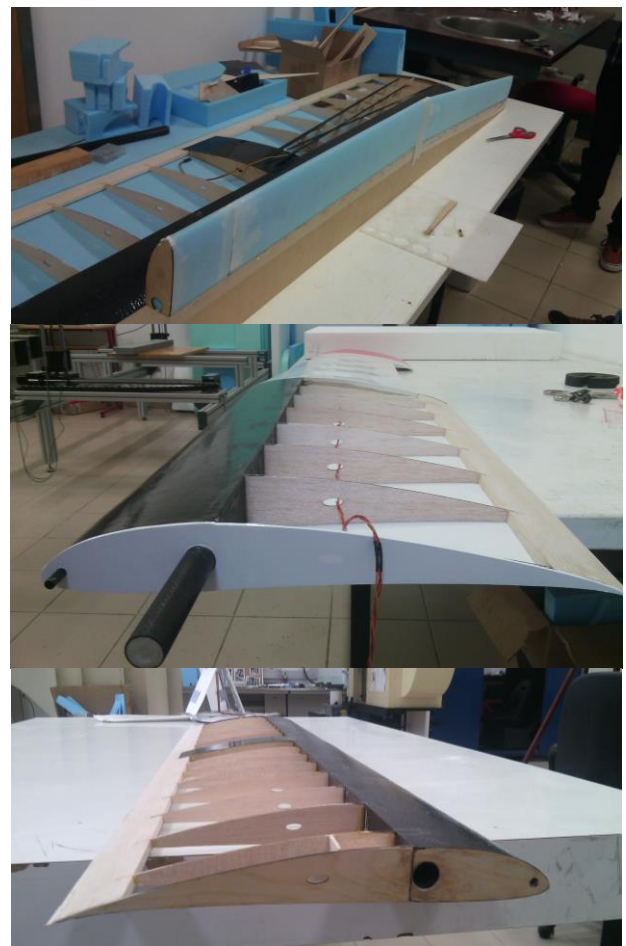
Some pictures illustrating the wing manufacturing: top) central wing panel on its mounting jig with machined leading edge foam of the left outer panel made of extruded polystyrene; middle) right outer wing panel; bottom) central wing panel.
